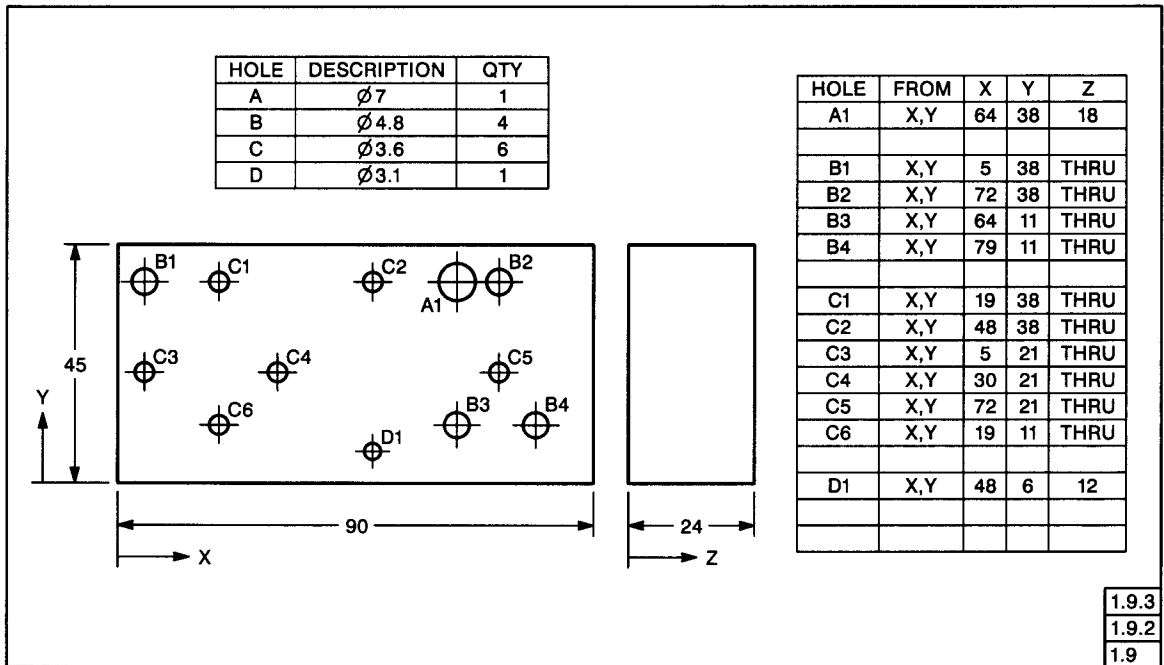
RECTANGULAR COORDINATE DIMENSIONING IN TABULAR FORM
